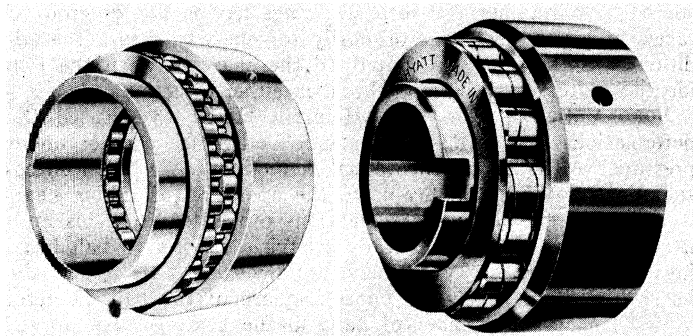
PARTS OF BALL ROLLER AND CYLINDRICAL BEARINGS
